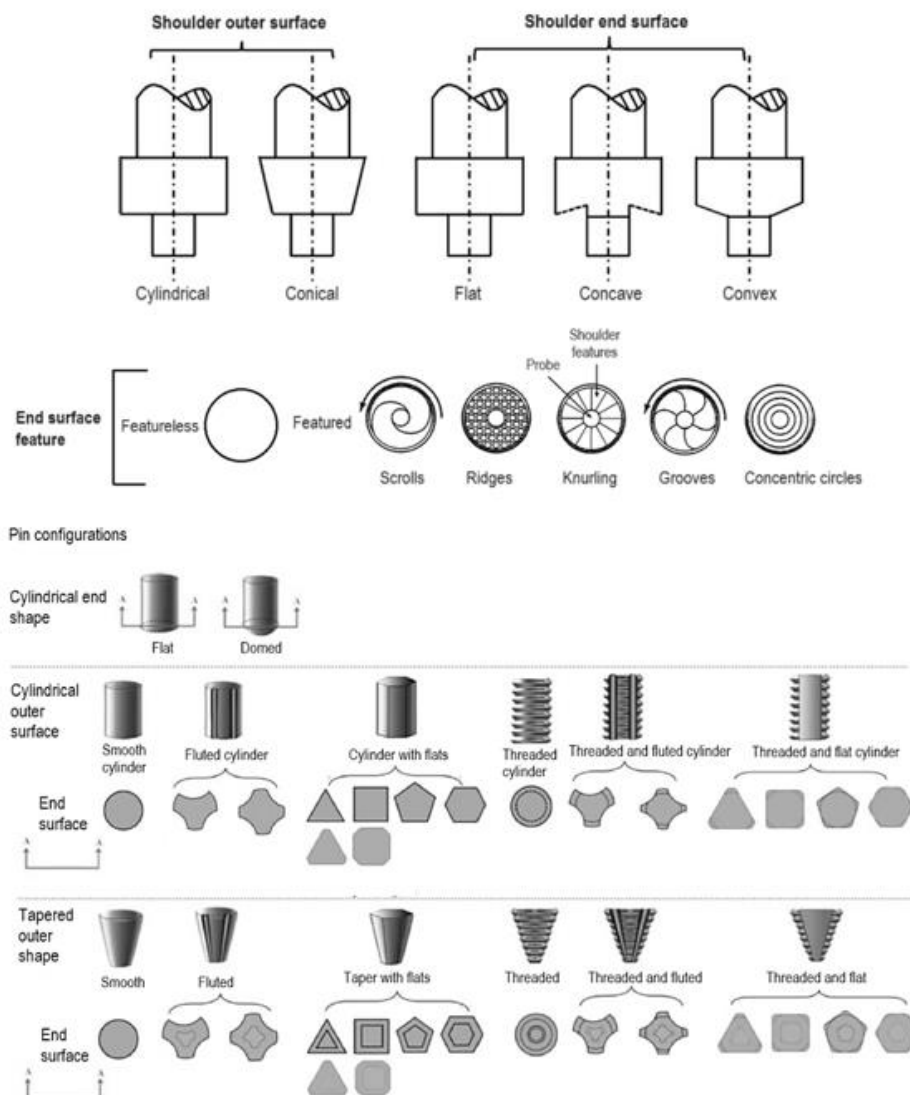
Types of shoulder and pin used in FSW (adapted from [5] and [14])
